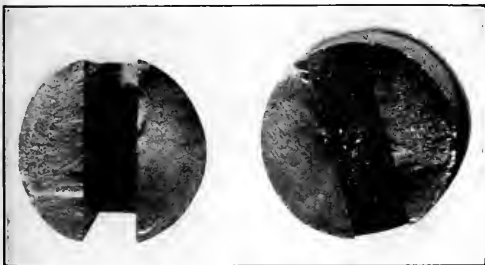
THE LIGHT SHADING INDICATES THE NEW FRACTURE OF THE PISTON ROD
